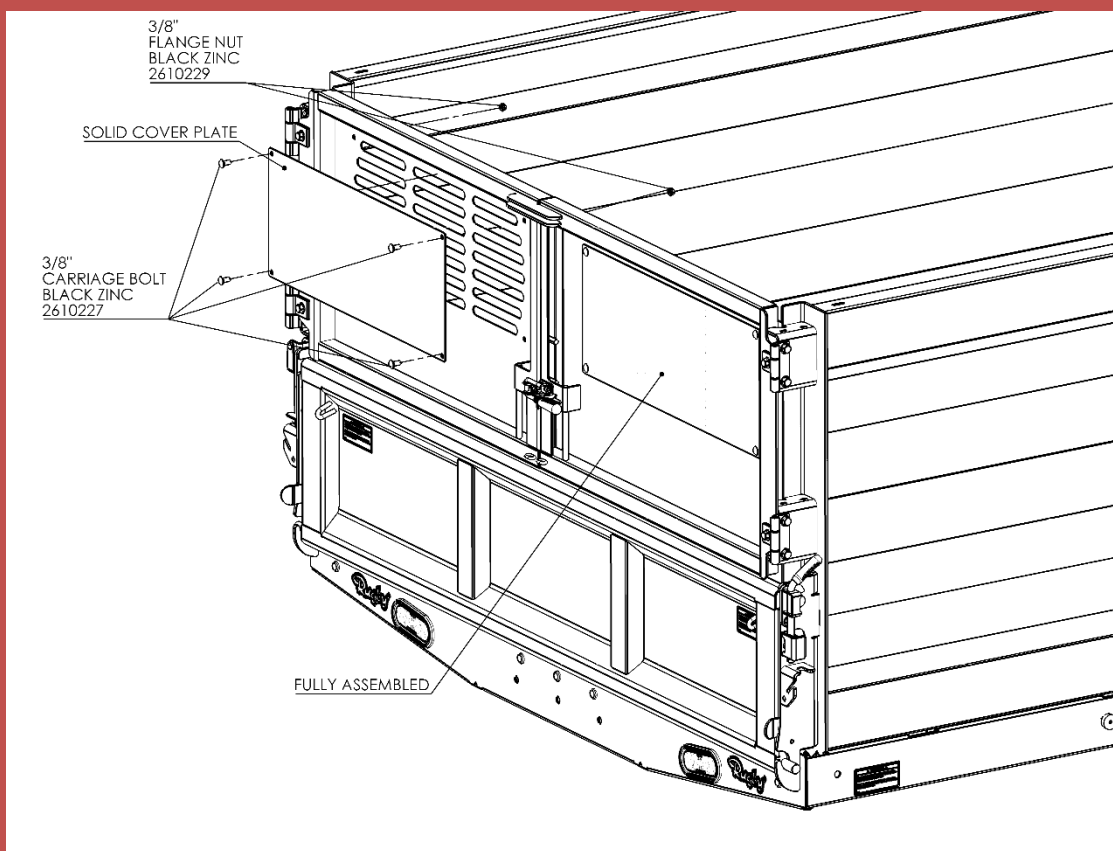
Installation of the 3-Piece Solid Door Cover Plates
